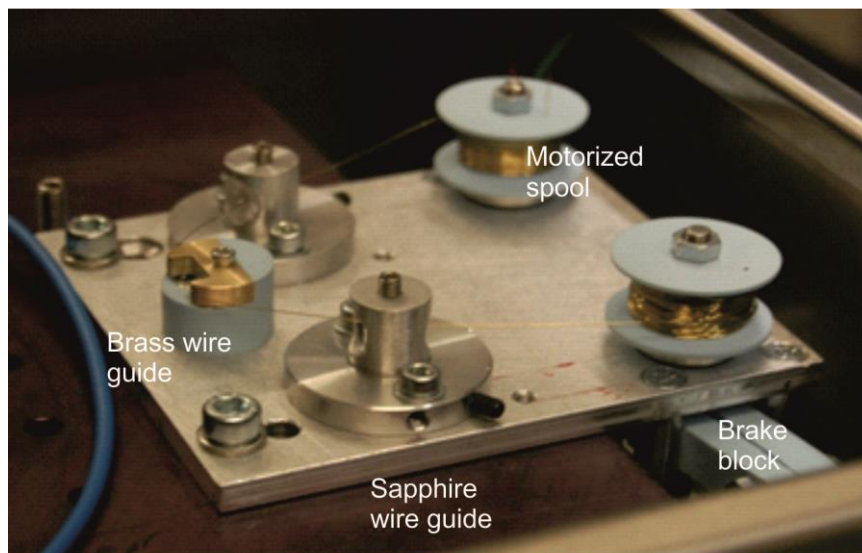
First wire feed system. A motor driven take up spool pulls wire from the supply spool around a front block with groove which is electrically live. A brake block around the supply spool shaft can be adjusted to give varying amounts of friction which controls the wire tension.
